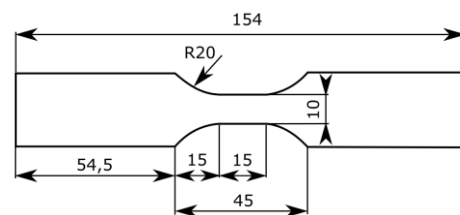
Dimensions of specimen used for cyclic tension-compression test
